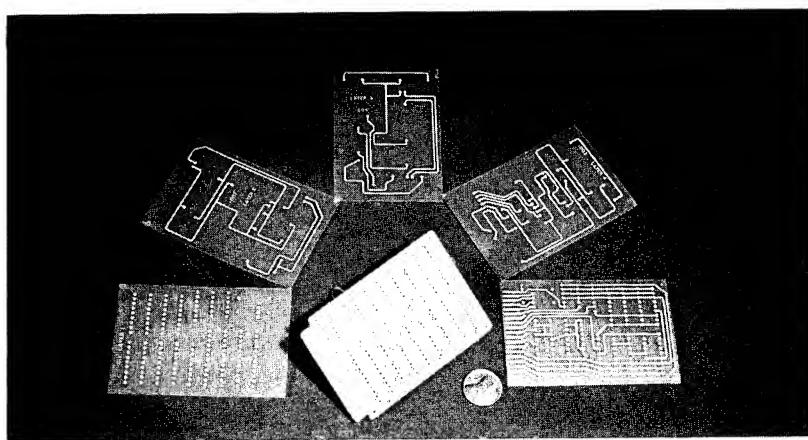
Five-layer circuit board plated-through-hole techniques.
